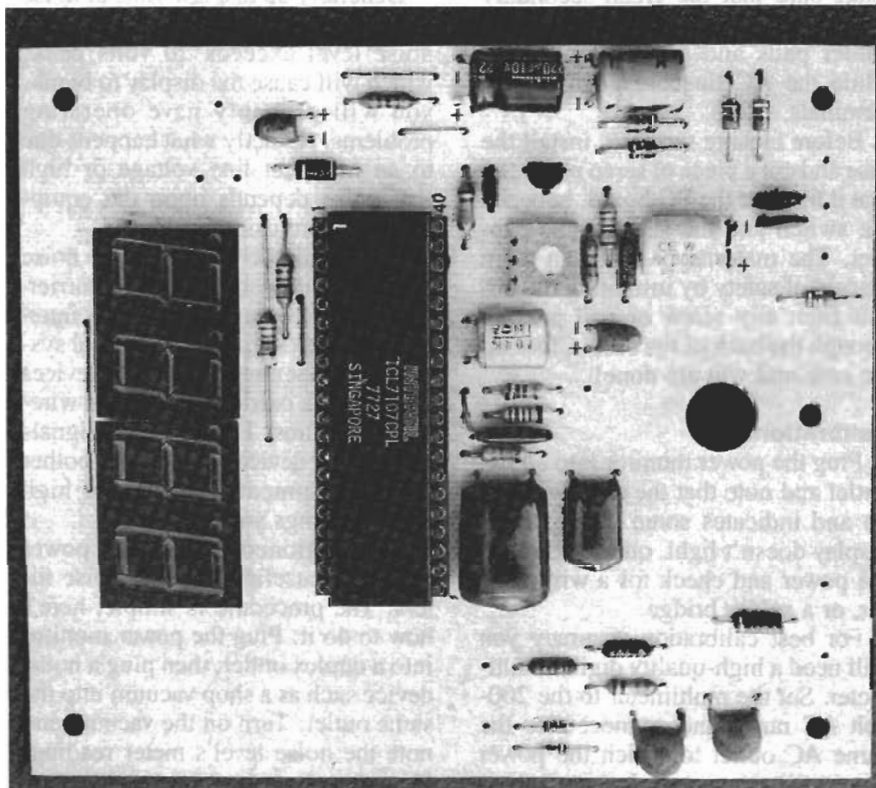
FOLD THE CAPACITORS FLAT AGAINST THE BOARD to ensure clearance between the board and the cabinet. To prevent strain on the leads, bend them before soldering.
